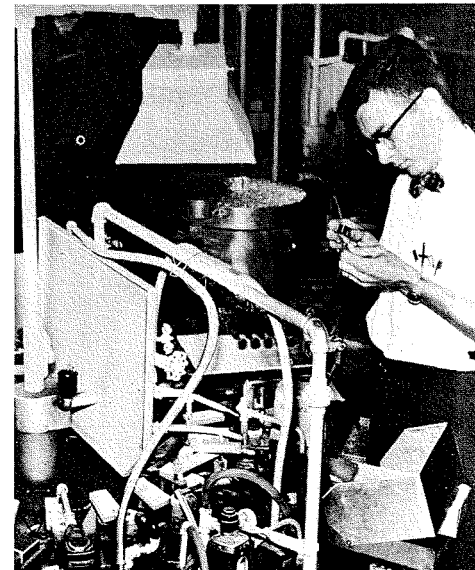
Equipment Development engineer Henry Blust inspecting stem produced on 24-head automatic miniature-stem-making machine.
